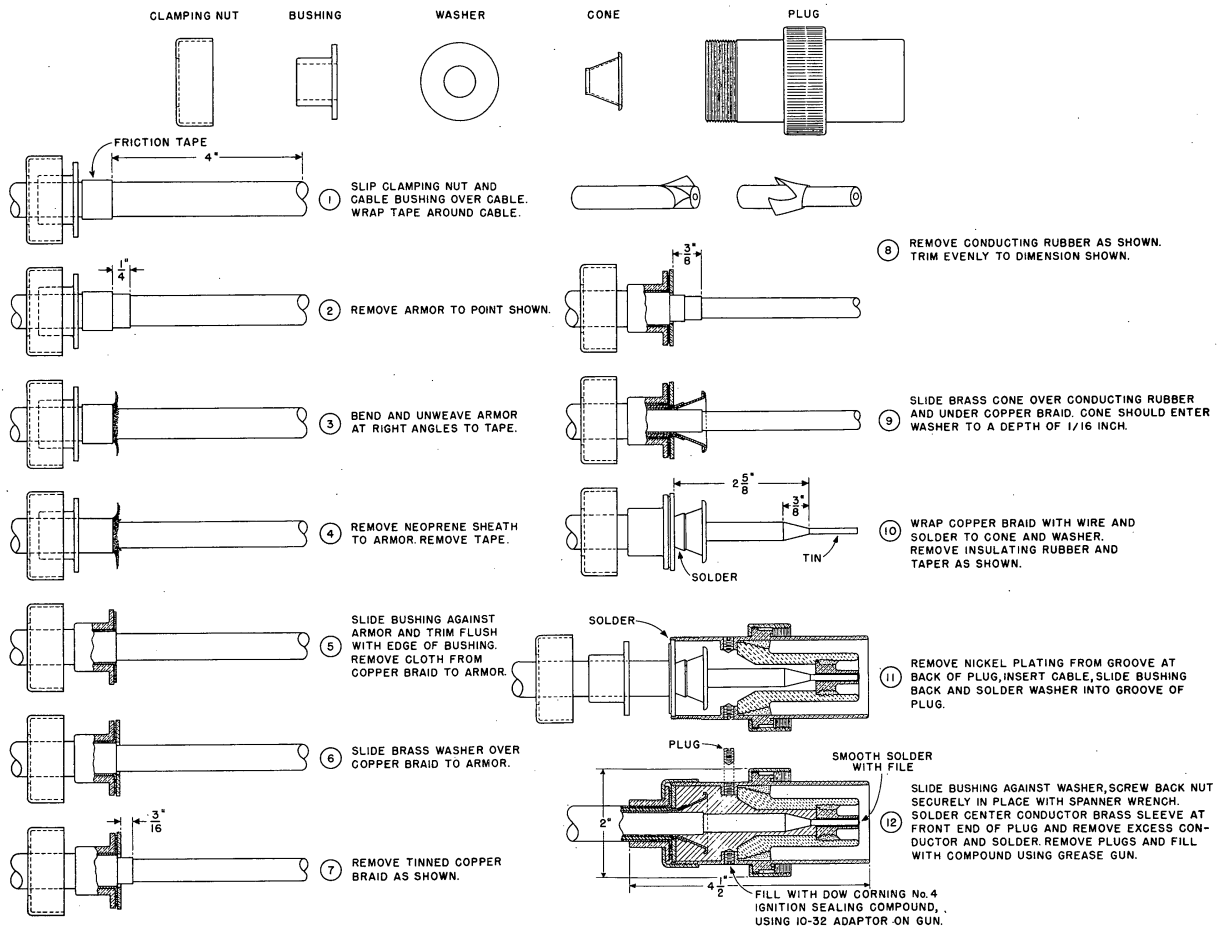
R.F. Connector, Type UG-36/U Assembly to R.F. Cable, Type RG-27/U
